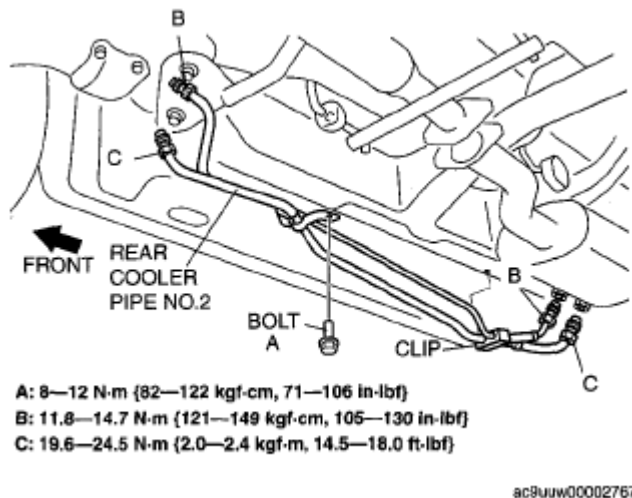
Identifying Rear Cooler Pipe & Torque Specifications
